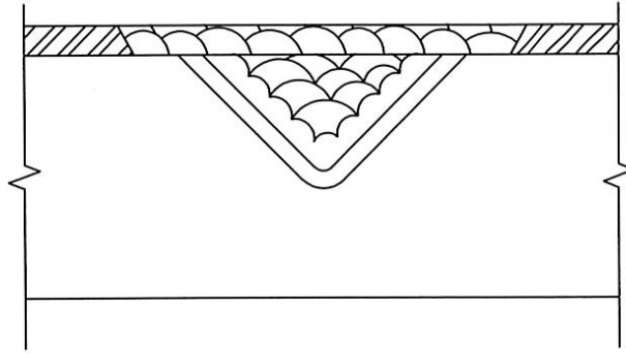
The Cladding Restoration Weld Involves Depositing a Butter Layer on the Cladding Bevel (a), Followed by Depositing Two Layers of Weld Metal (b) over the Entire Area Where the Cladding Has Been Removed
